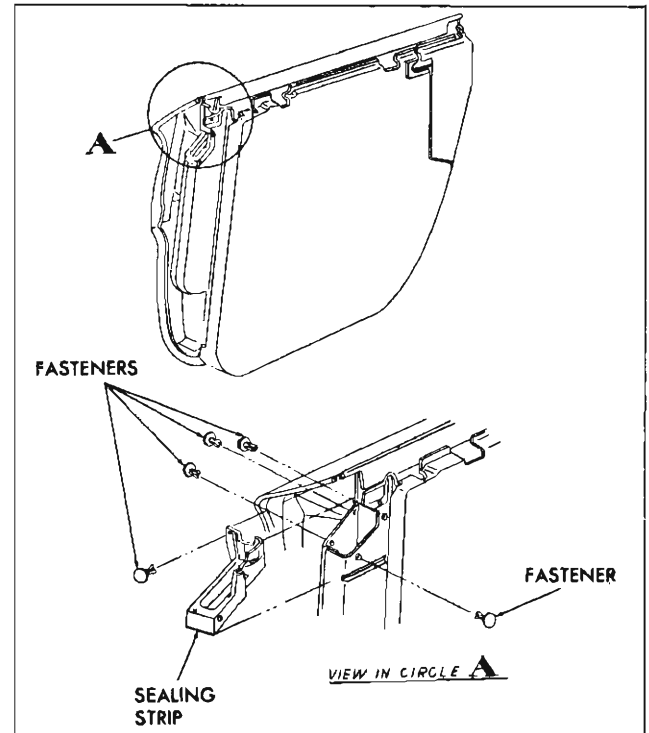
Rear Door Hinge Pillar Sealing Strip
